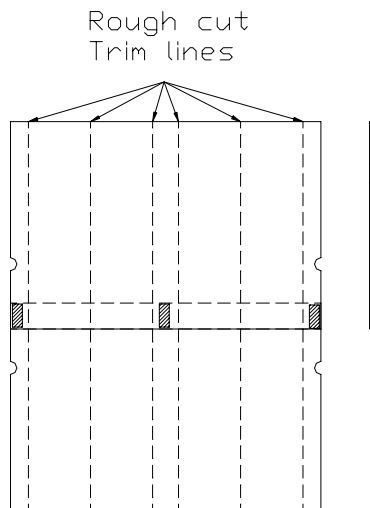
SCHEMATIC OF BONDED ALUMINUM ASTM D 1002 SUBPANEL SHOWING LOCATION OF SPACERS AND ROUGH-CUT TRIM LINES FOR EACH SPECIMEN
